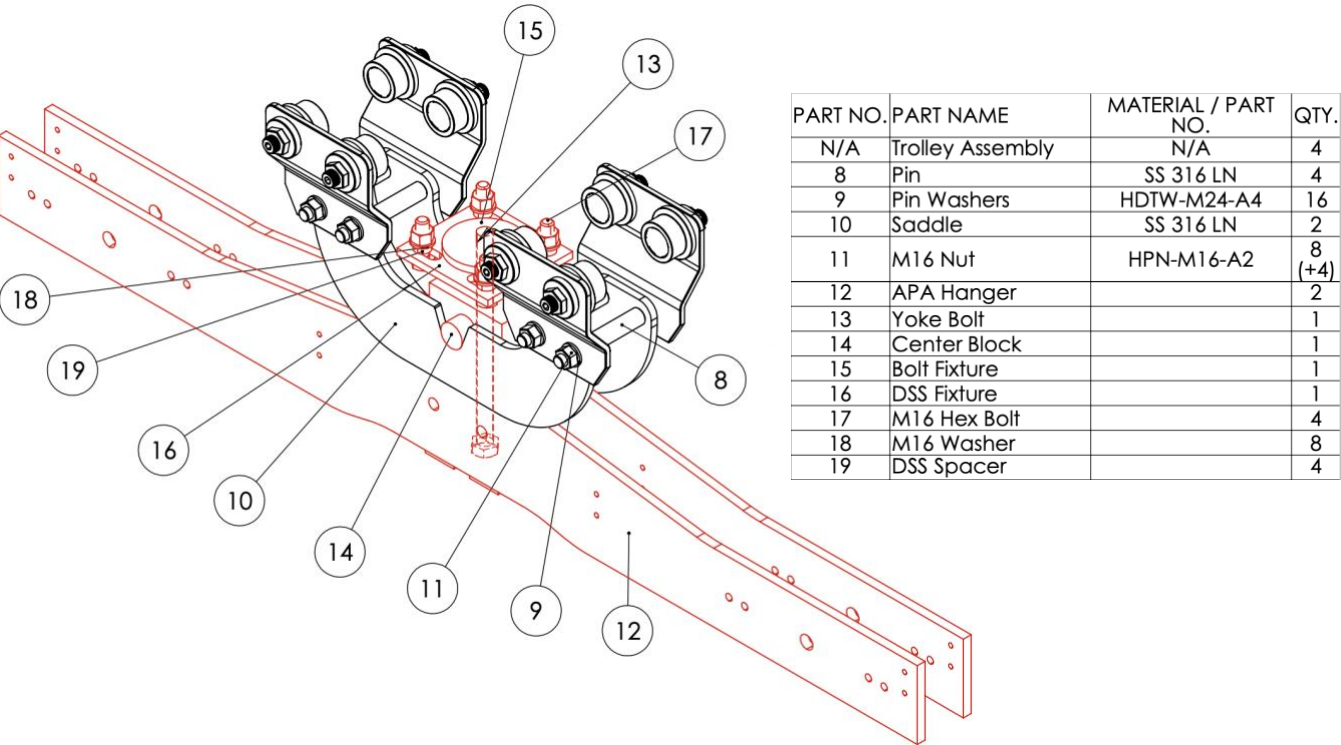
Bill of materials referencing the assembly of the hoist trolley, red outlines the APA attachment assembly.
